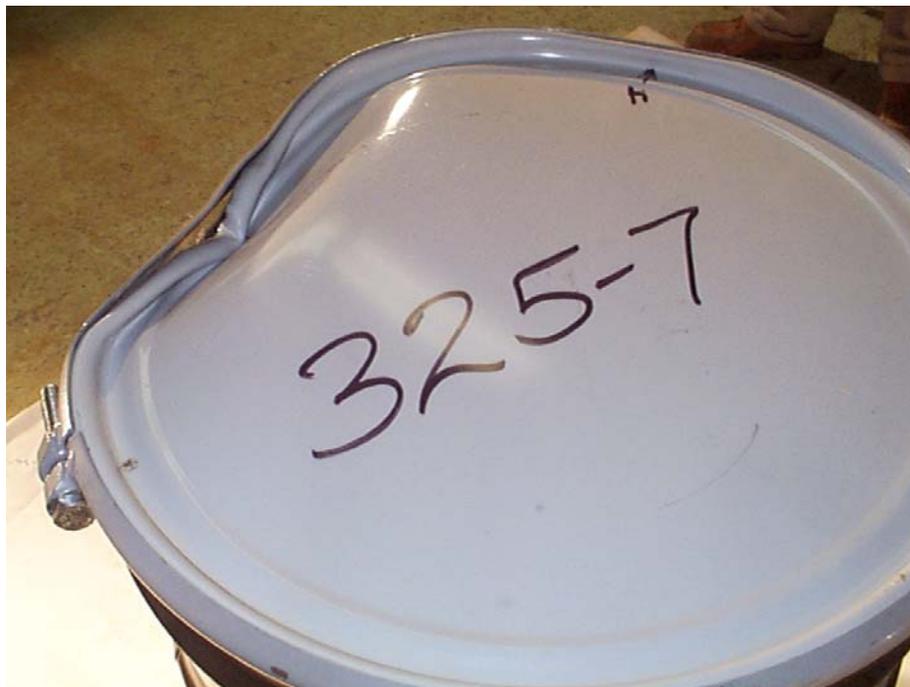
Package 325-7 closure ring separation at the point of impact: 5/8-in deep by 6-in length.
